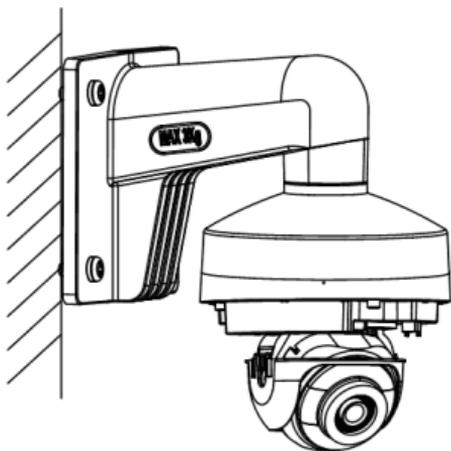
Fix the Camera to Wall Mounting Bracket
